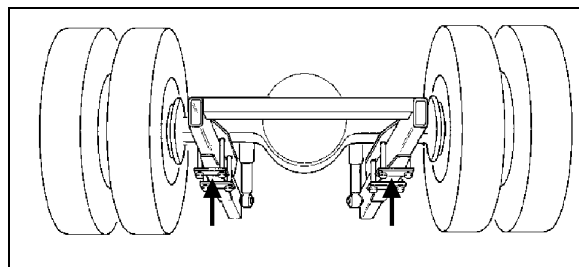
JACKING POINTS ON DRIVE AXLE
